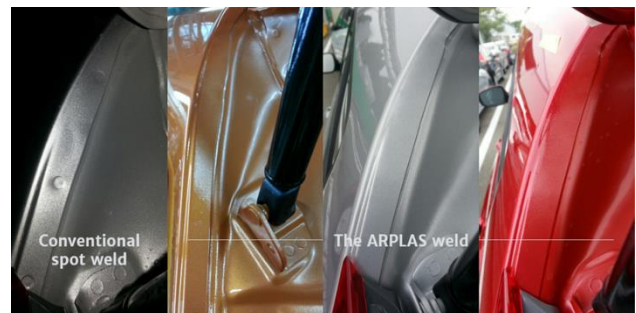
Arplass system produces invisible welding spots [38]
